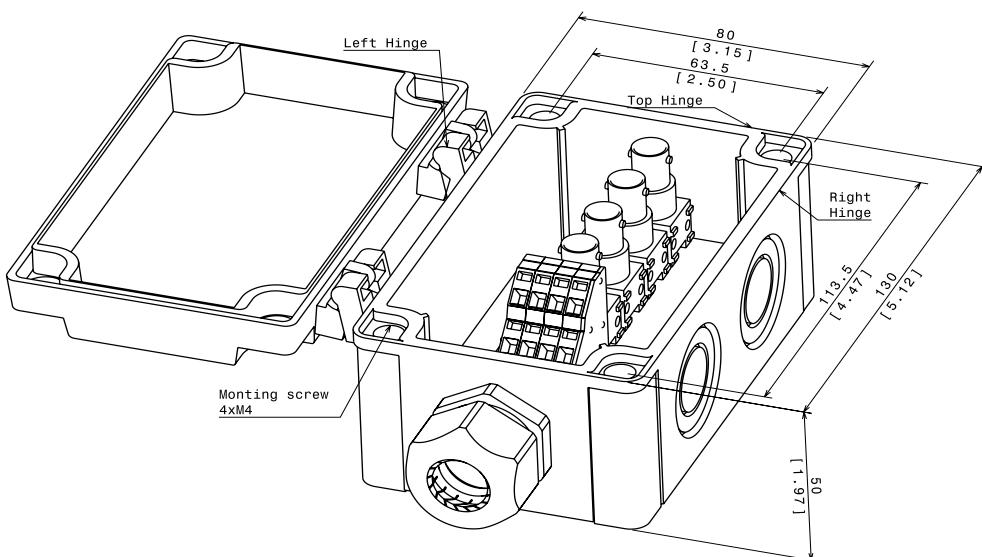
Outline drawing, model 751.01-XX-02 (LH)
